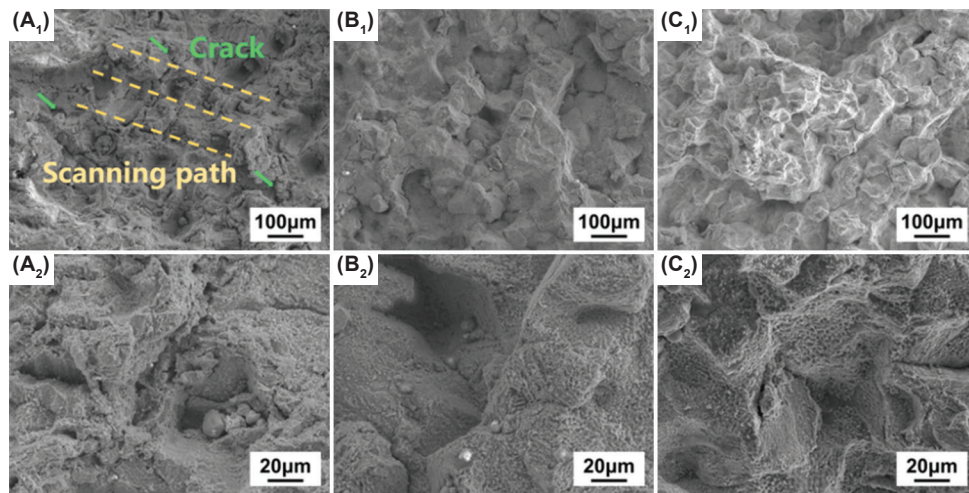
illustrates the fracture surface of HIP tensile specimens at high-temperature deformation. Part of the
